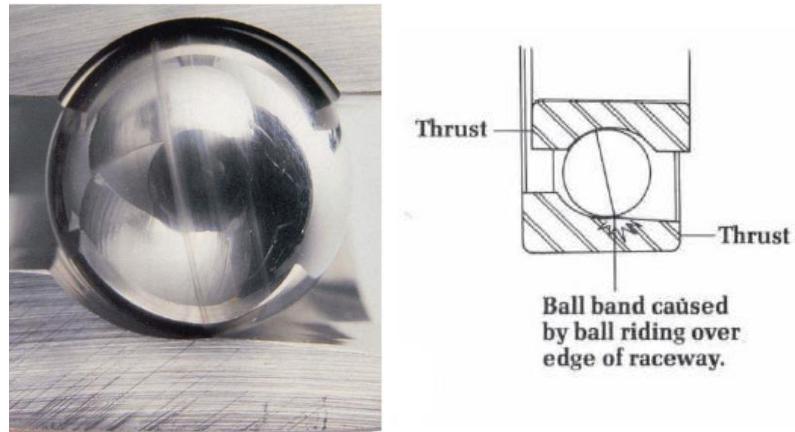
Ball damage of angular contact ball bearing. (Barden, n.d.)
